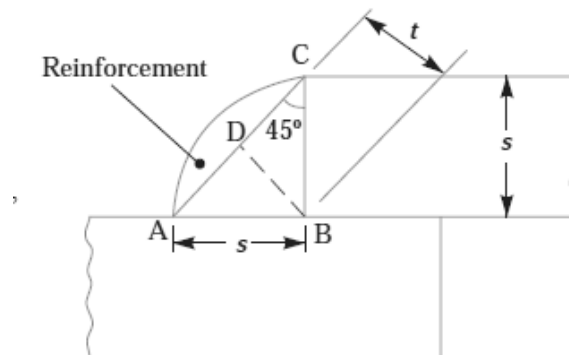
Enlarged view of a fillet weld.
